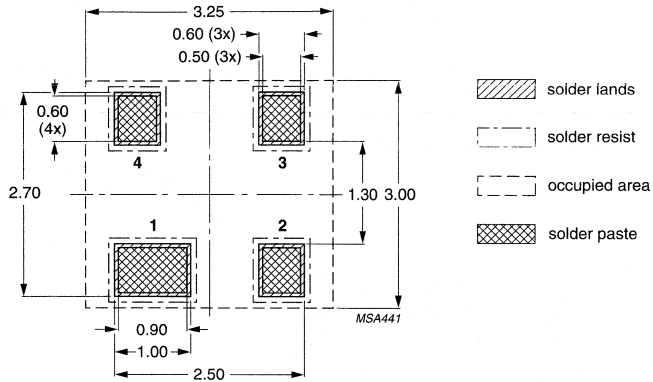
Reflow soldering footprint for SOT143 (footprint for SOT143R is mirror image).
